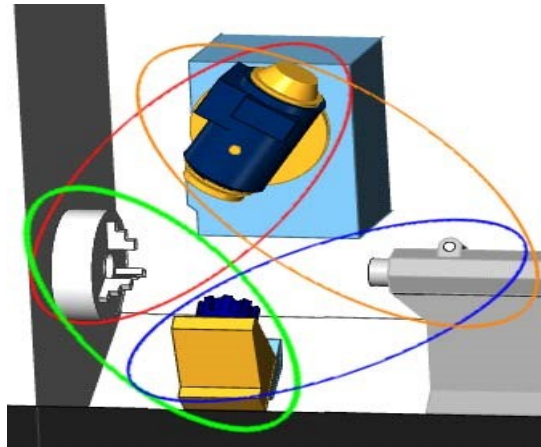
Four Submachines (Work Zones) on a Machine with two Tool Devices and two Workpiece Devices
